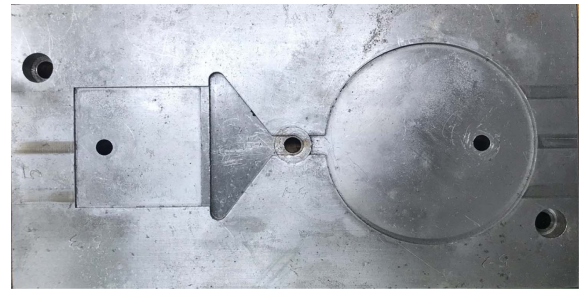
Molds for injection molding of circular shape and rectangular shaped specimens.
